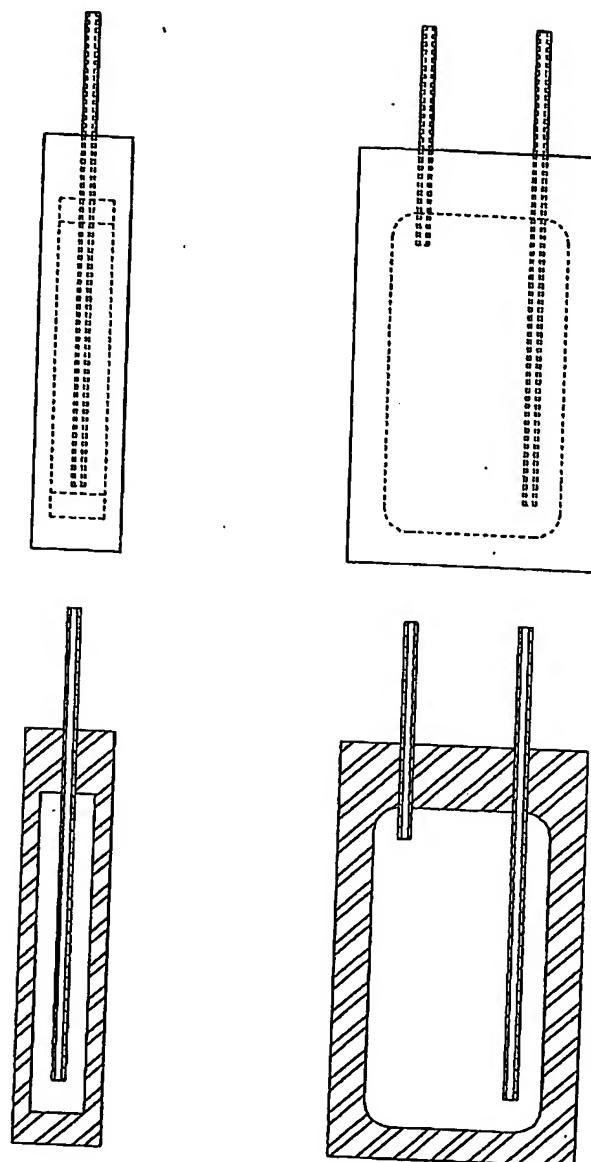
Hollow micro-porous degasser plate containing inlet and outlet tubing for introduction and removal of purge gas. Other option is to remove the hydrogen gas using a vacuum instead of purge gas.
